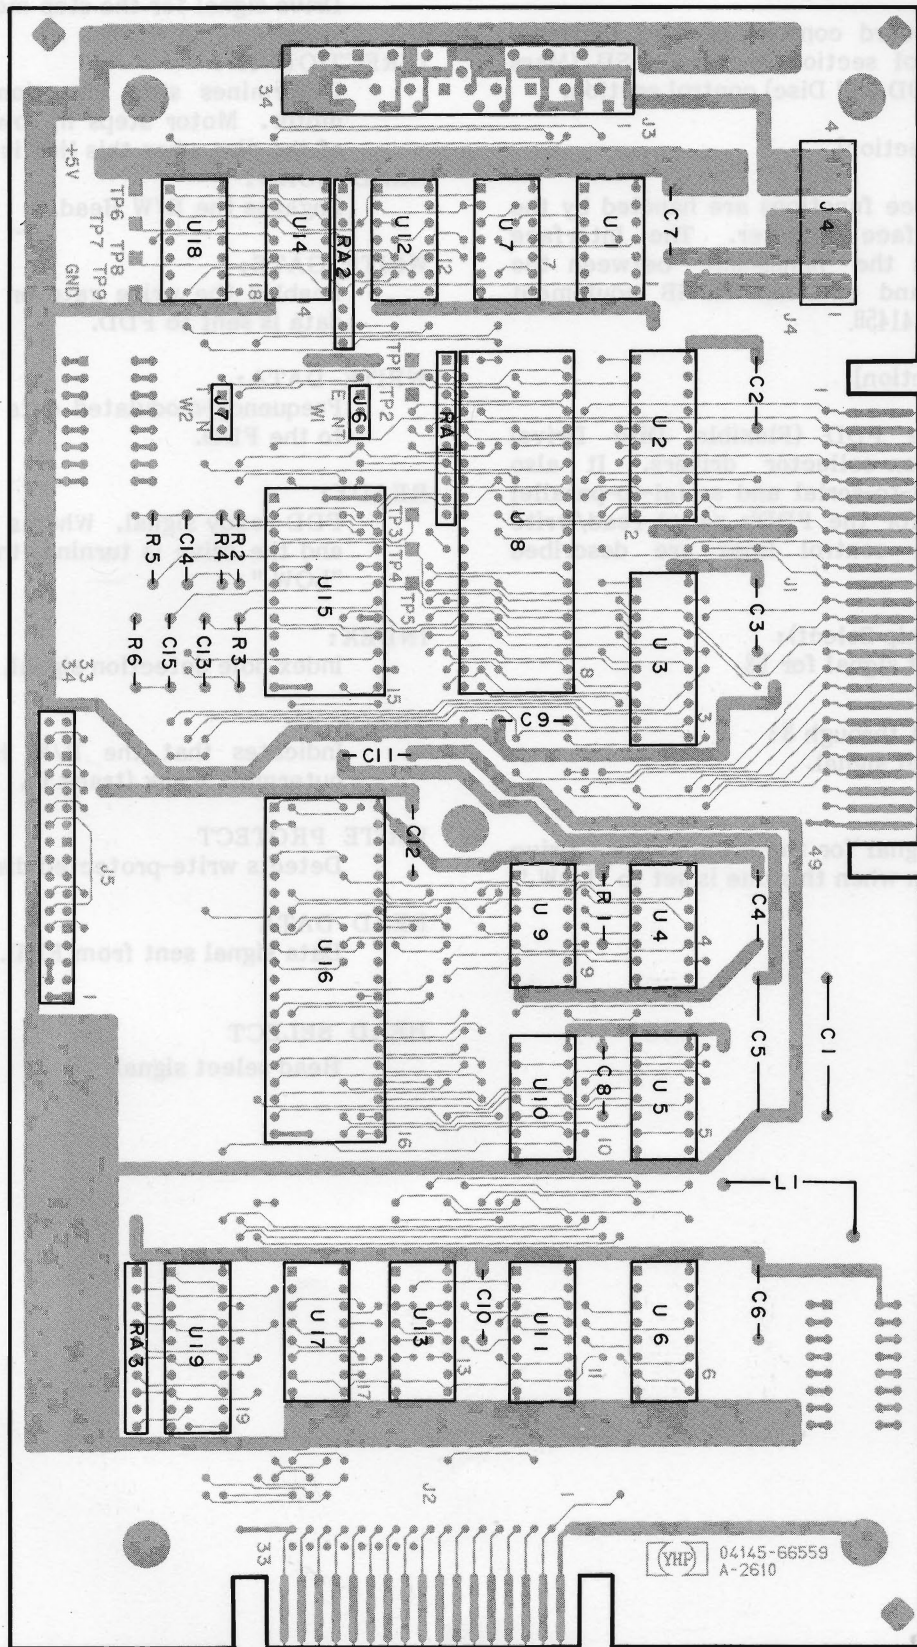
A9 HP-IB and MSU Control Board Assembly Component Locations.
